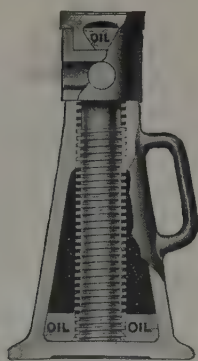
Screw Jack. Buckeye Jack Mfg. Co.
